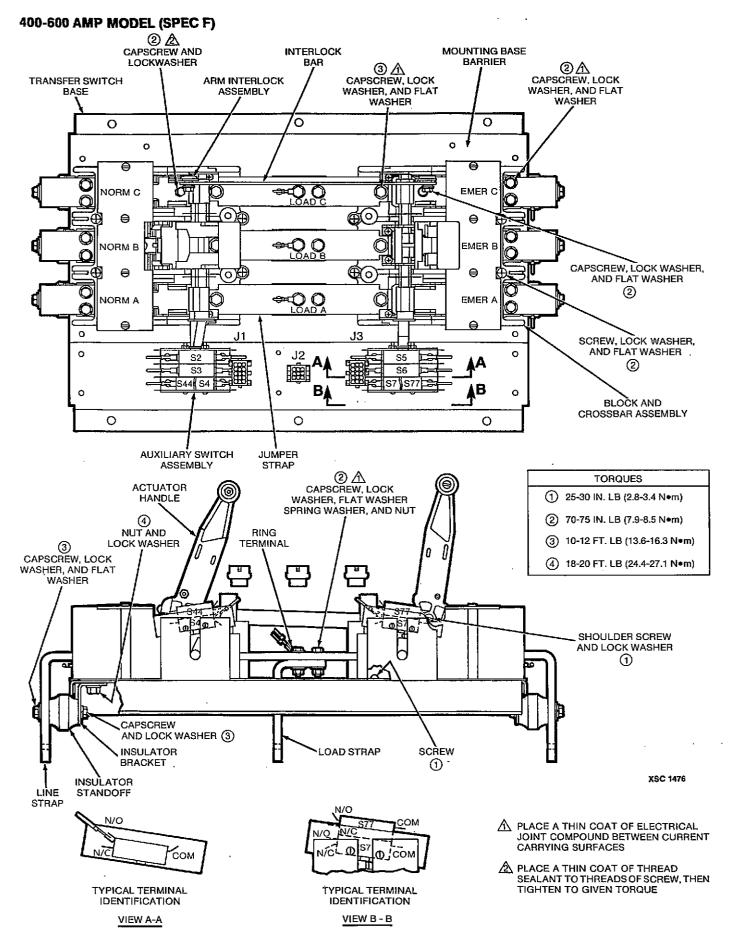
REAR CONNECT TRANSFER SWITCH ASSEMBLY
